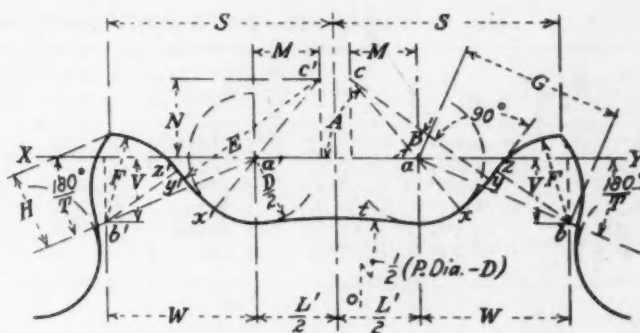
TOOTH FORM FOR BLOCK CHAINS
